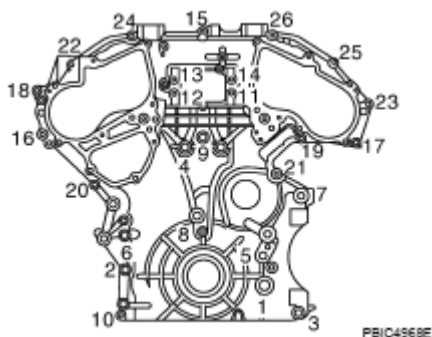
Identifying Front Timing Chain Case Mounting Bolts Tightening Sequence
